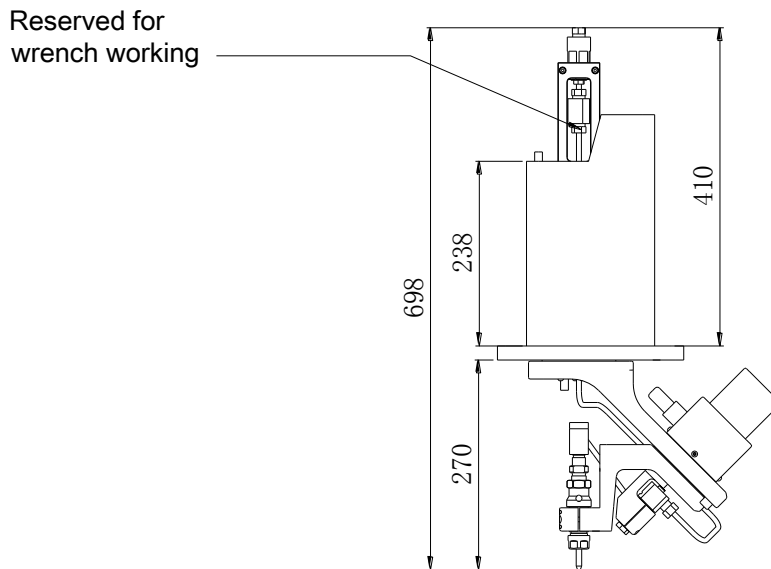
Dimensional drawing of WJAC-70-xxxx-03 (Front view)
